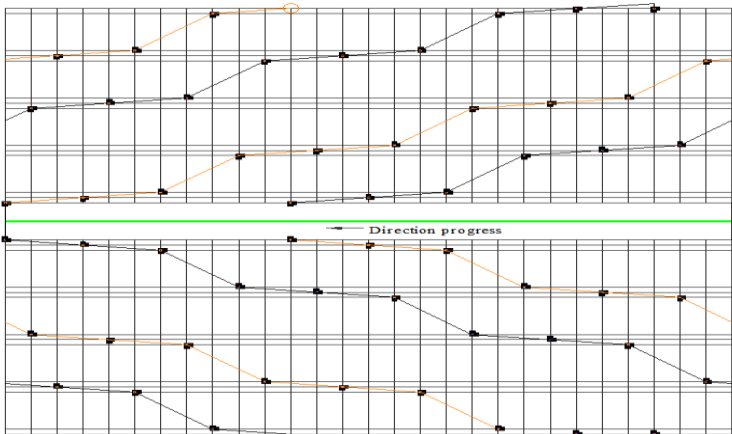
Blade arrangement on the banded soil-covering shaft
